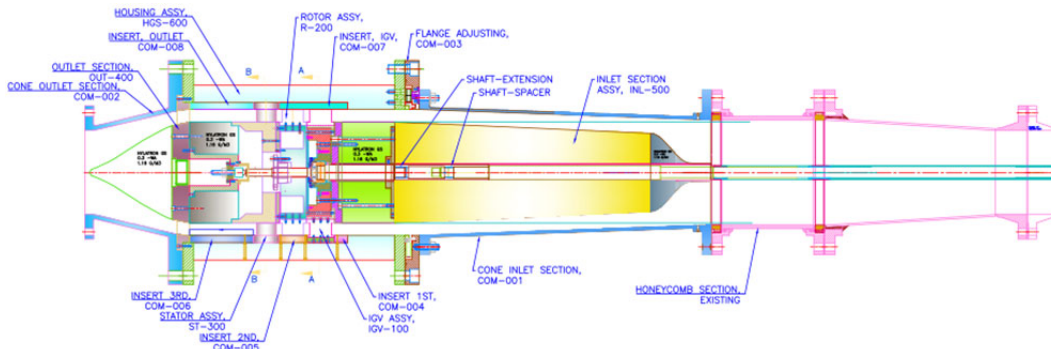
A magnified cross section of the complete NASA 1-1/2 stage axial turbomachine setup.
